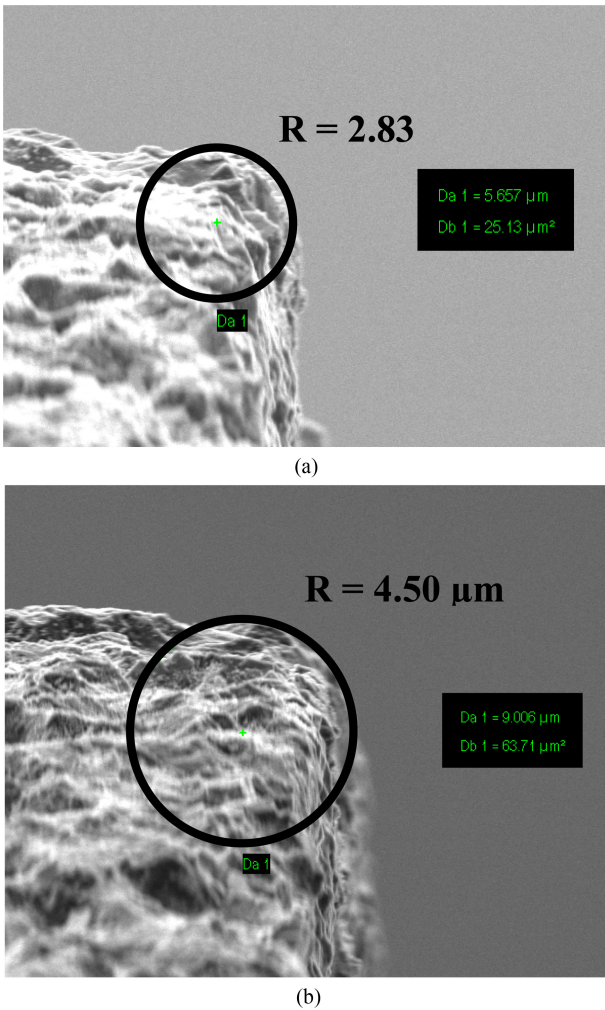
Edge radius of disk tool (a) before machining and (b) after machining
